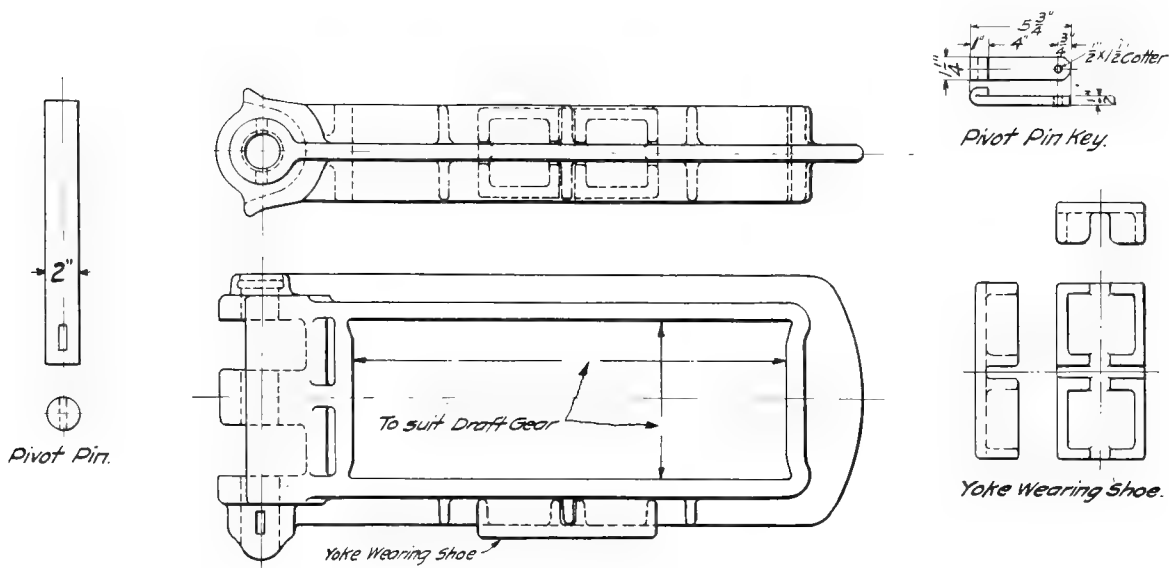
Cast Steel Yoke with Quadruple Shear Pivot Pin.
